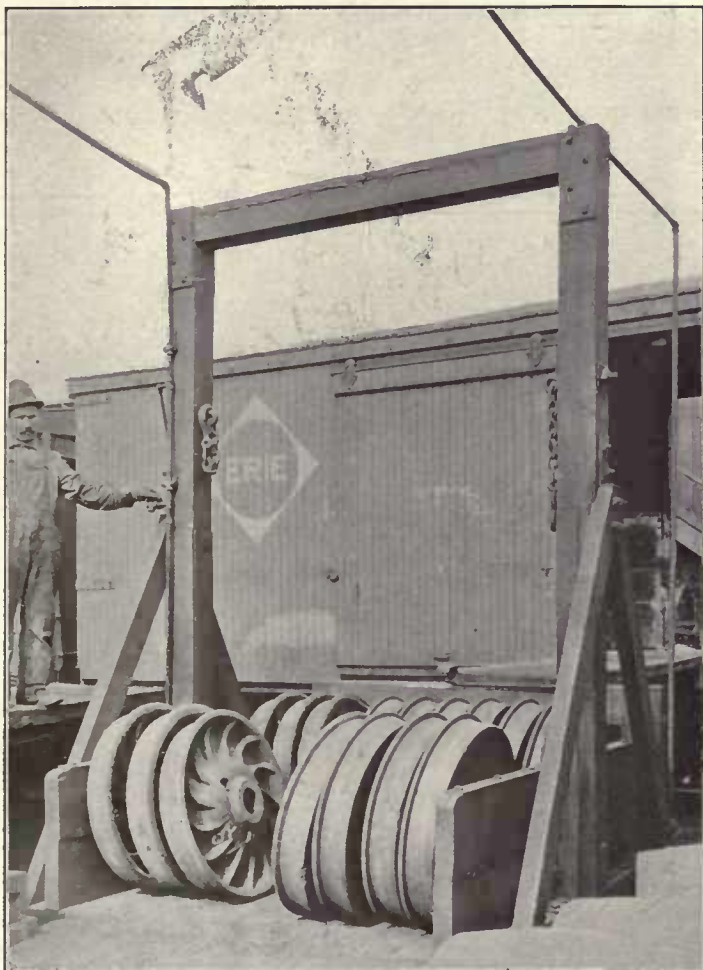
Sixteen Car Wheels on Hoist Ready to Be Raised.
